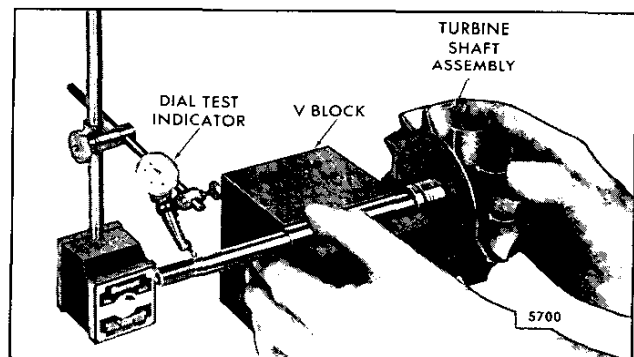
Measuring Concentricity Between Large and Small Turbine Shaft Diameters
